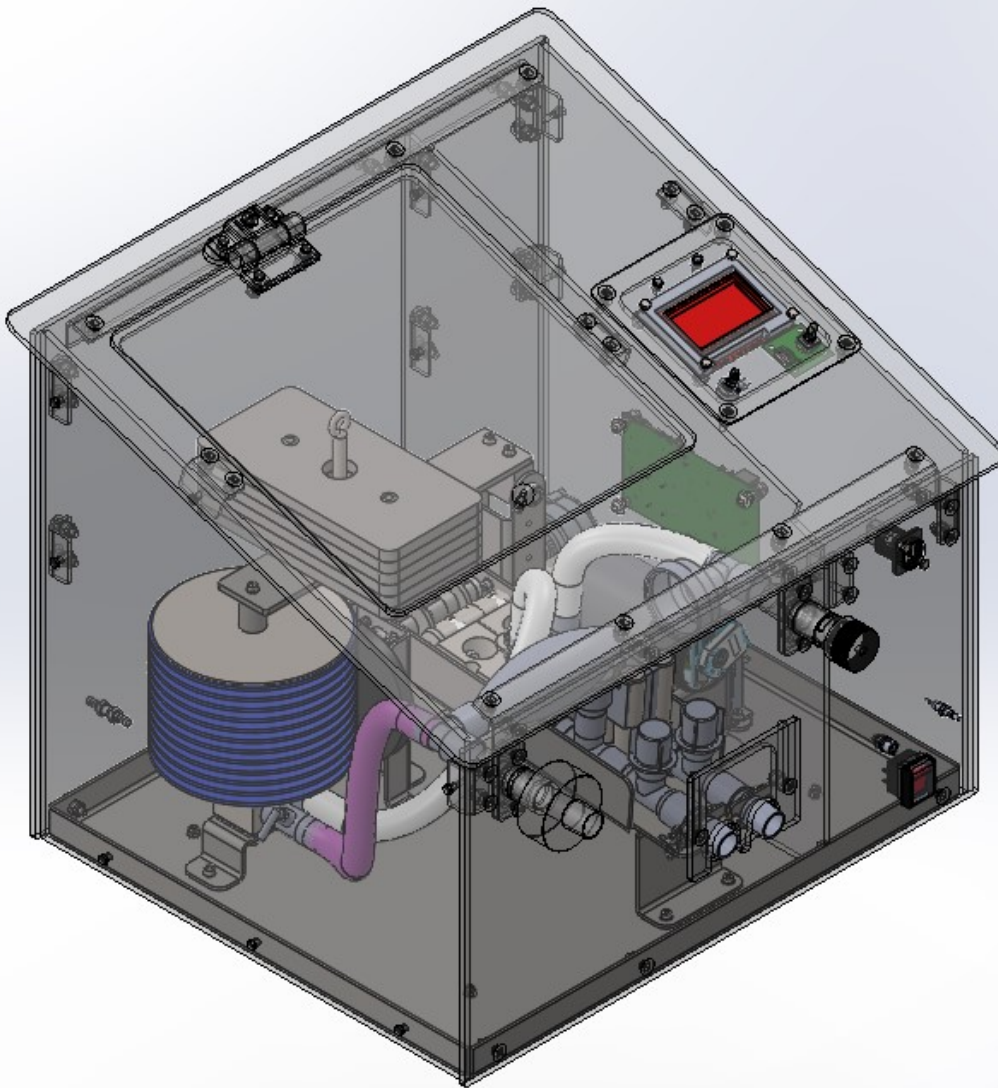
Isometric view of the device, for viewing purpose the housing is made transparent
